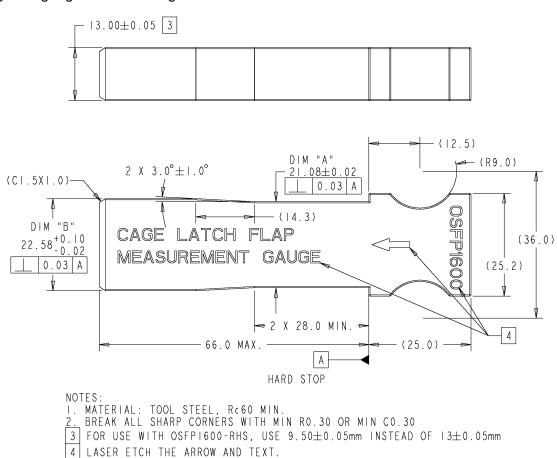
OSFP1600 Cage flap location inspection gauge (Reference)
